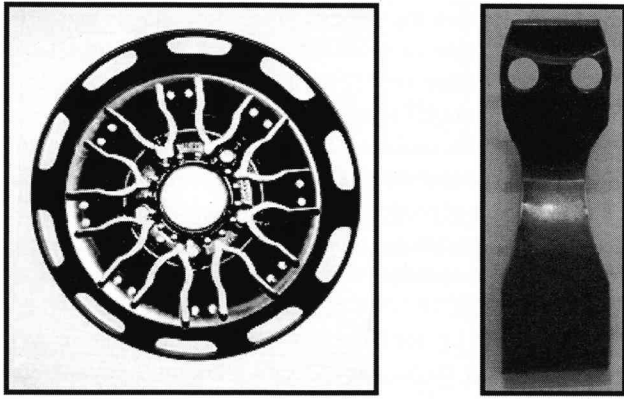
Centre disc as machined into H-G shaped fatigue specimens, on the right a typical H-G specimen as removed from the machined disc
